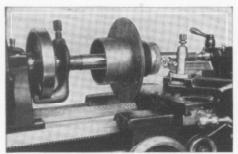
Threading a Wheel Hub Mounted on a Mandrel Between Lathe Centers
